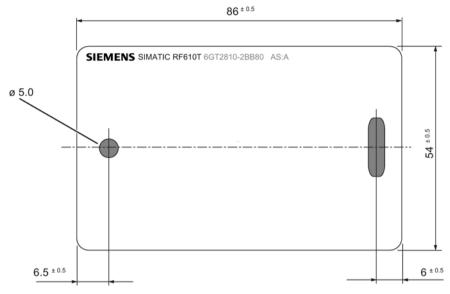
Dimensional drawing of SIMATIC RF610T
